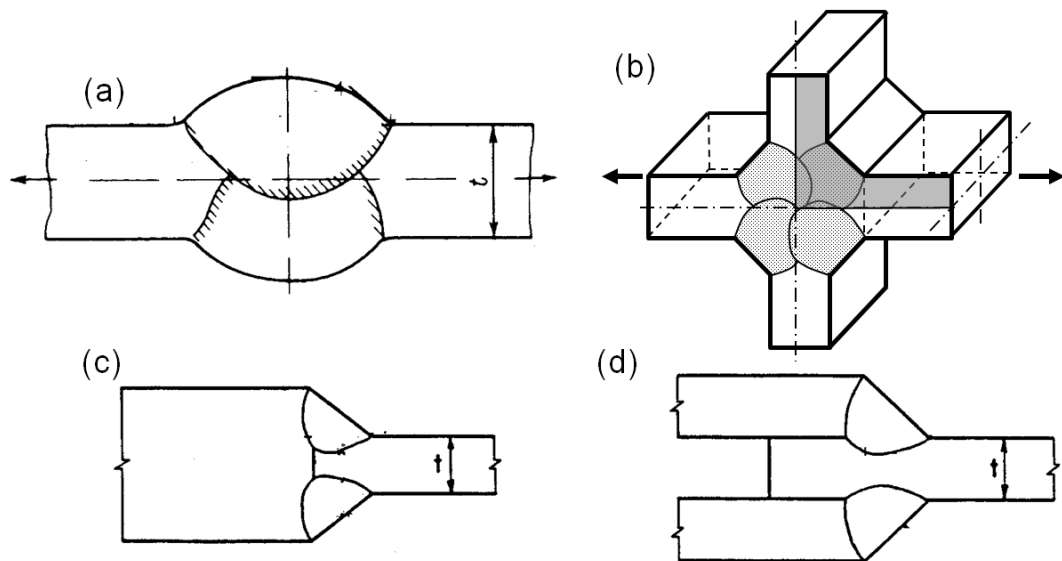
Examples of geometrically symmetric welded joints
